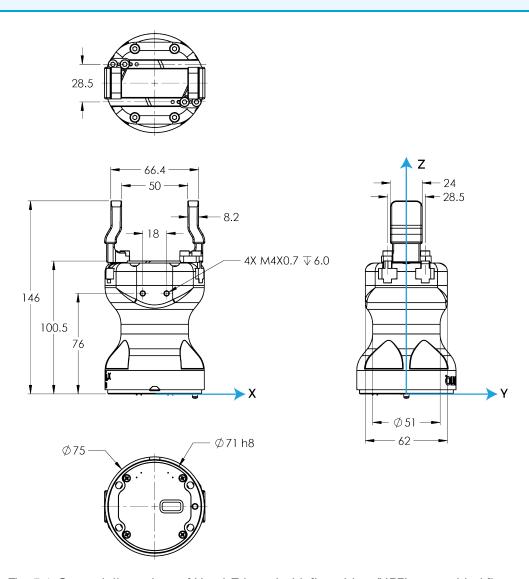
General dimensions of Hand-E (open) with flat rubber (NPR) overmolded fingers.
